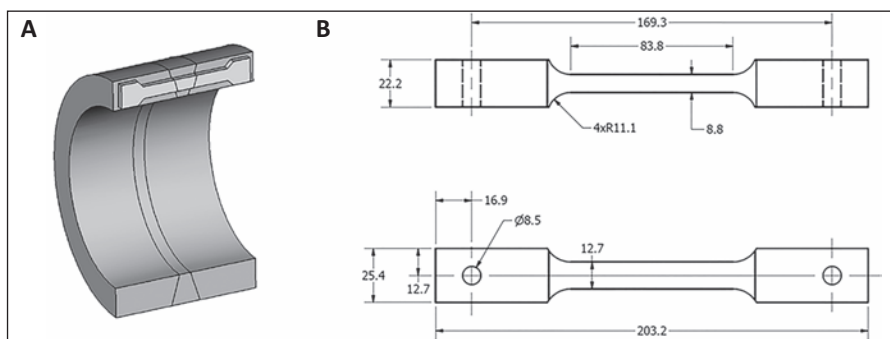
A — Schematic of cross-weld creep test specimen extracted from the welded pipe after PWHT; B — the dimensions of the creep rupture specimen (in mm).
